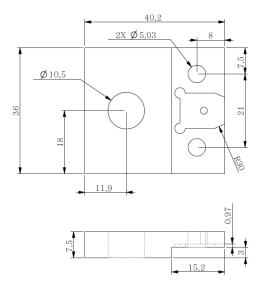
Dimensions of the specimen holder (all dimensions in mm).
